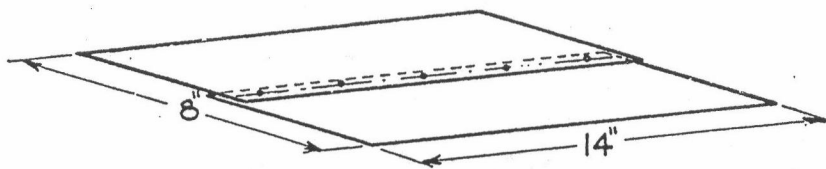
PERSPECTIVE VIEW OF RIVETED LAP SEAM
